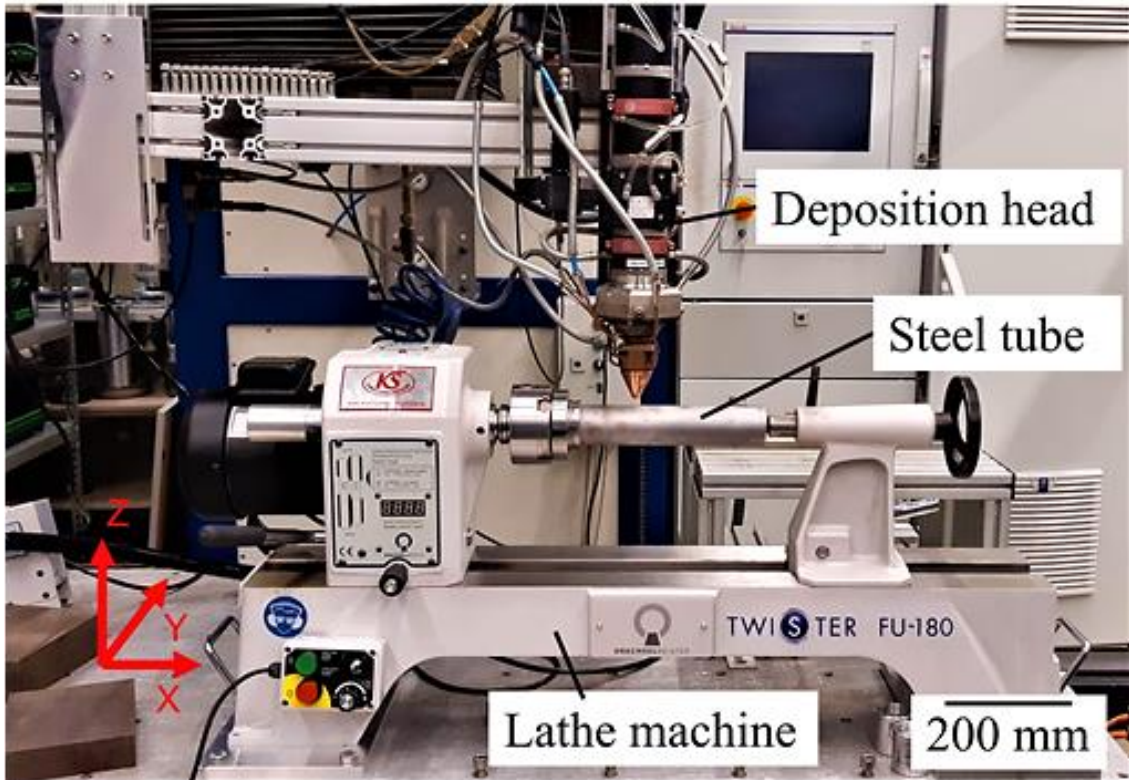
Photographic depiction of HSLC machine setup, integrated in L-DED machine 2.
